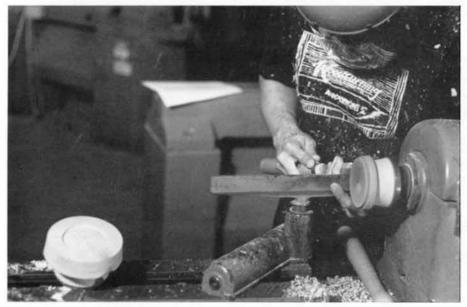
Mount the inlay material to a scrap block and cut a flange using a parting tool.
